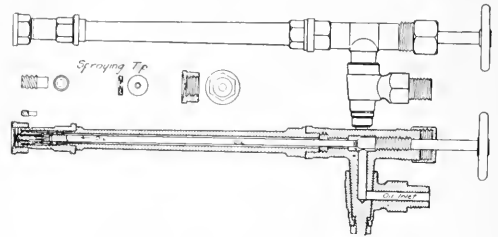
Mechanical Burner Used in Baku Oil Fields of Russia.
